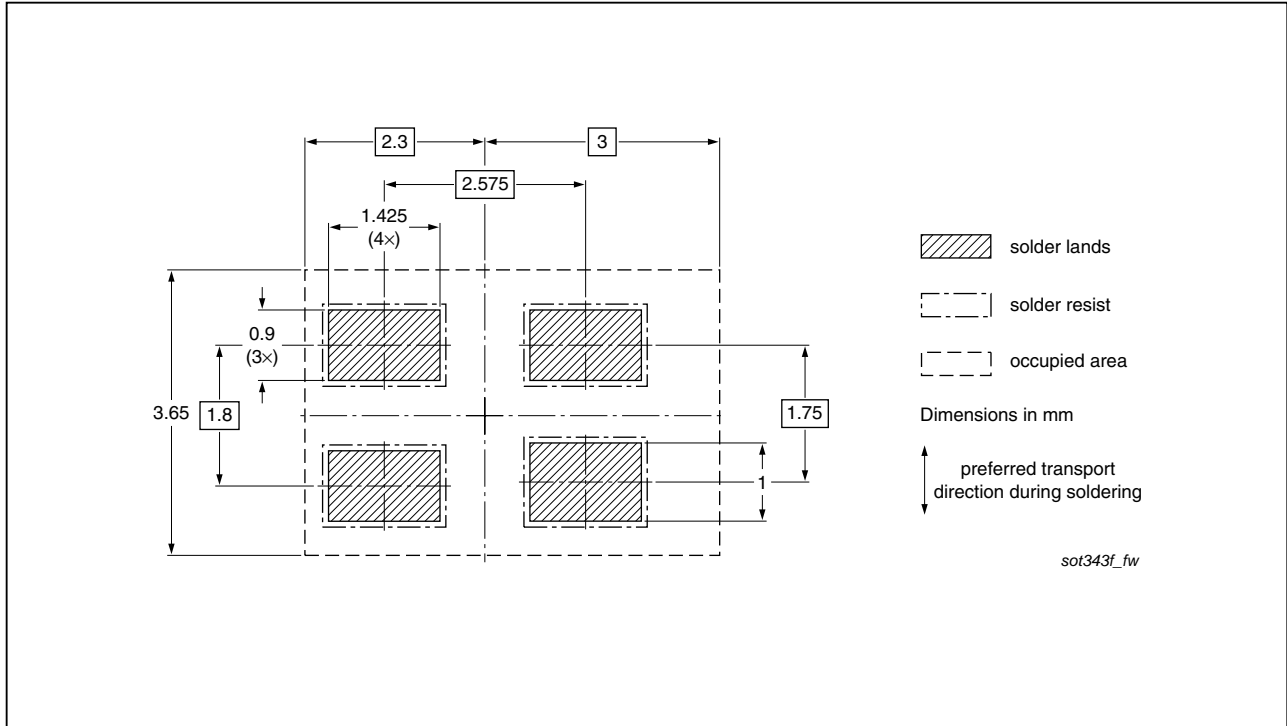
Wave soldering footprint for SOT343F (DFP4)
